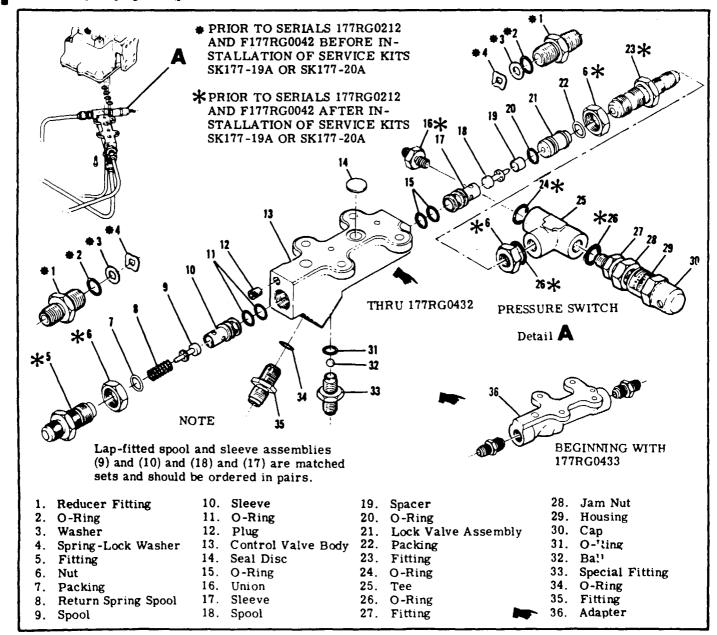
Power Pack Disassembly (Sheet 2 of 2)
